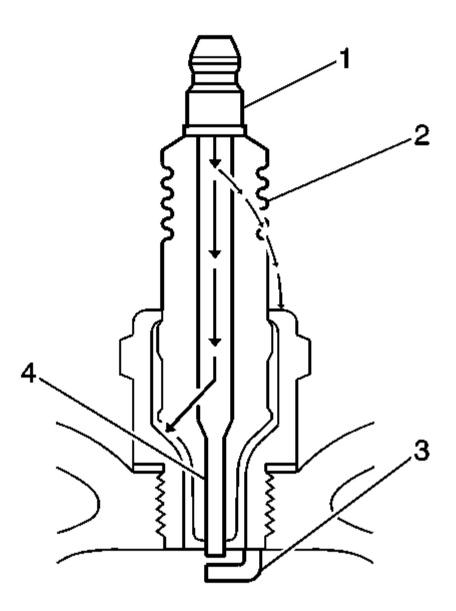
Inspecting Spark Plug Insulator Courtesy of GENERAL MOTORS CORP.
